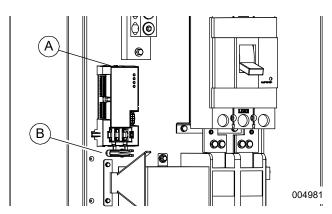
Test Pushbutton and Fuse Removal/ Installation Tool
